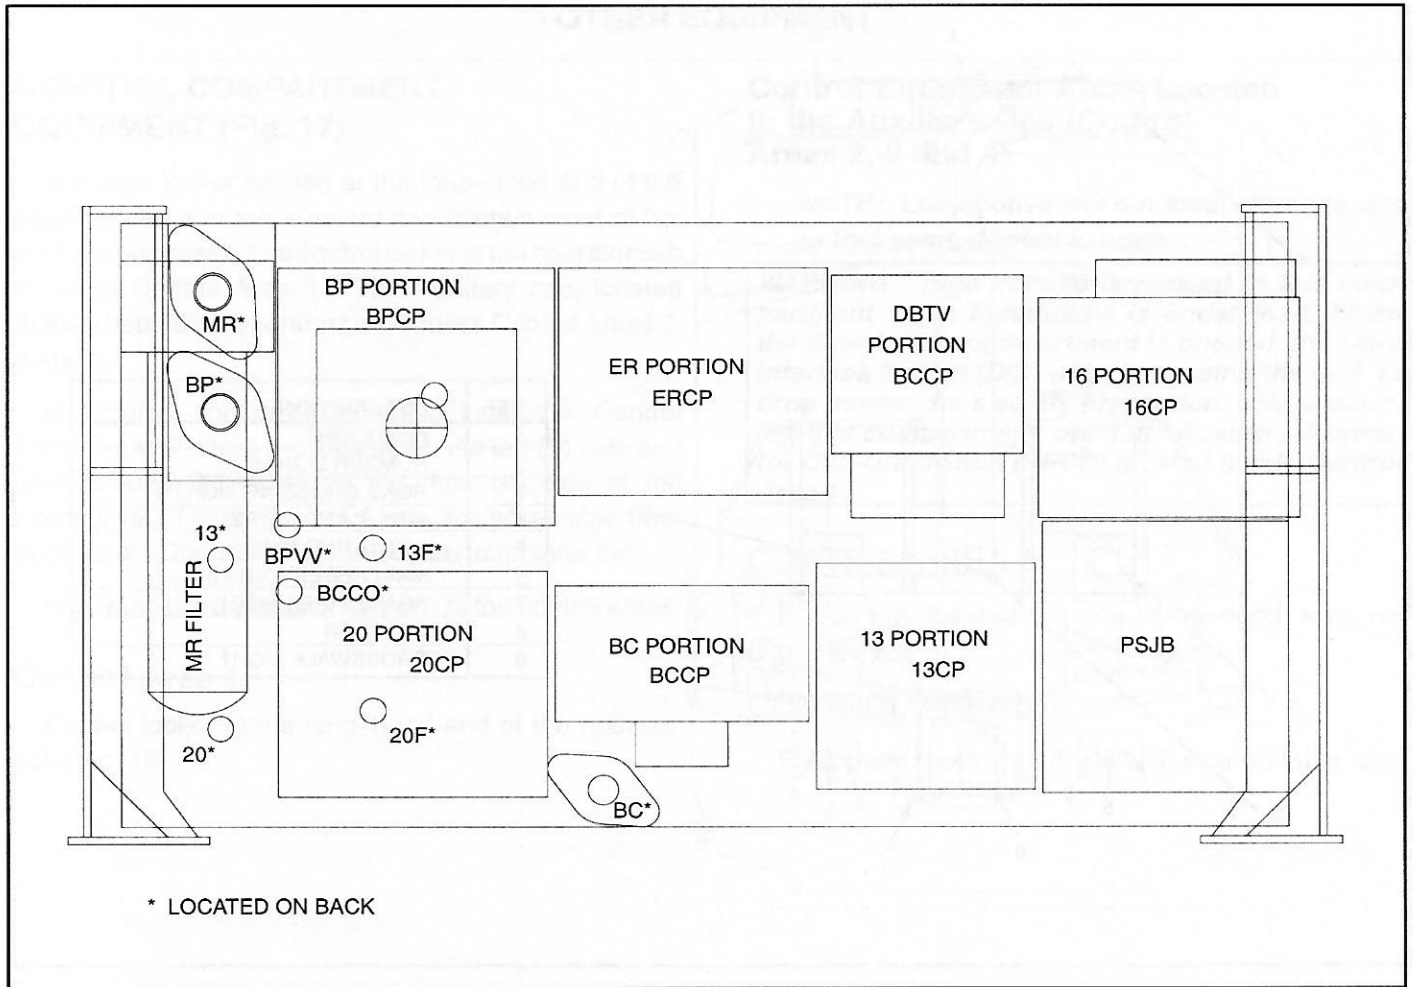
TYPICAL GE HARRIS CCBII ELECTRONIC AIR BRAKE EPCU ASSEMBLY. E-43344.
